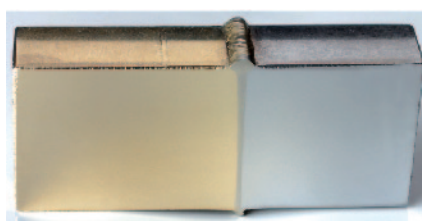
Combination of steel and bronze, 30 mm deep electron beam weld (Reproduced courtesy: Probeam)
